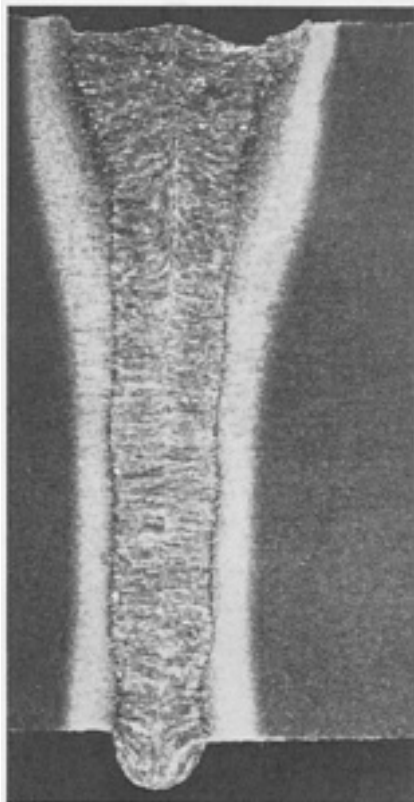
14-mm ($\frac{9}{16}$ -in.) A-710 steel plate, outogenous single-pass laser butt weld. Heat input: 0.014 MJ/m. Macrograph shows the high depth-to-width ratio of the weld bead and the limited size of the heat-affected zone. 2% nital. 8×
